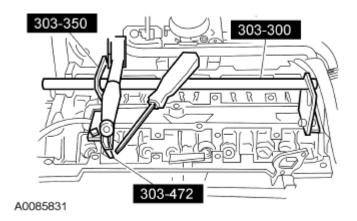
Inserting Valve Spring And Valve Spring Retainer Courtesy of FORD MOTOR CO.
